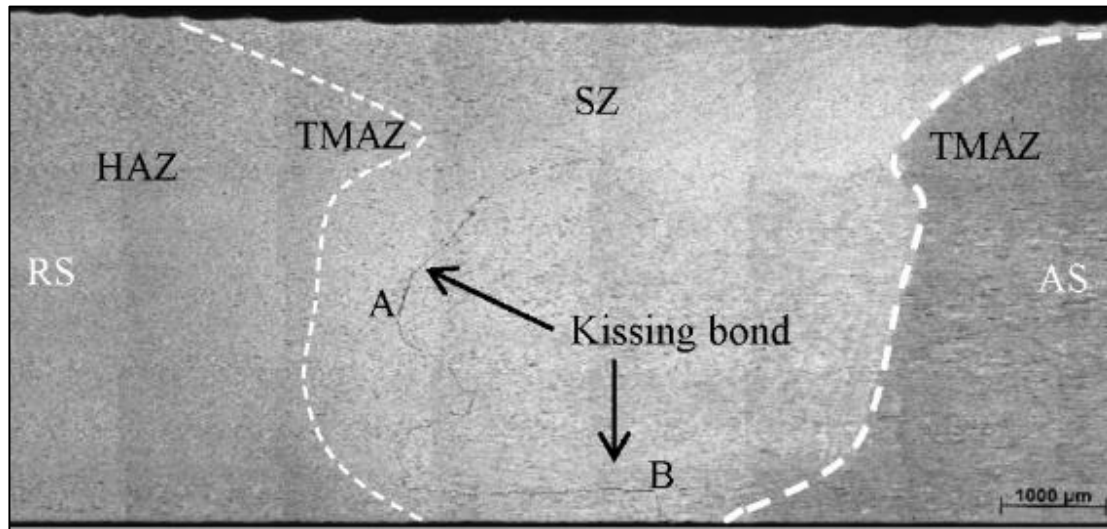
5 The weld zones macrostructure of the AA5083 FSW weld ($\omega=1000\text{rpm}$, $v=300\text{mm/min}$).
